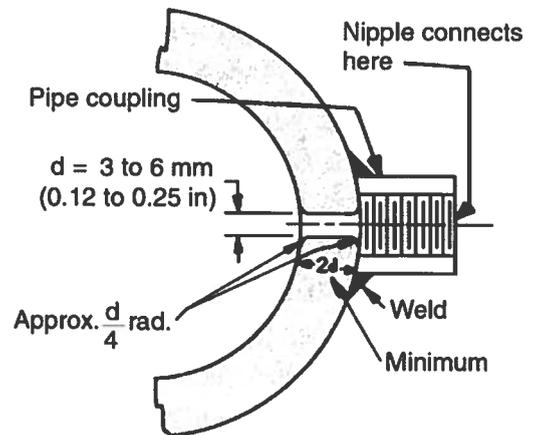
Welded-on pressure tap opening
